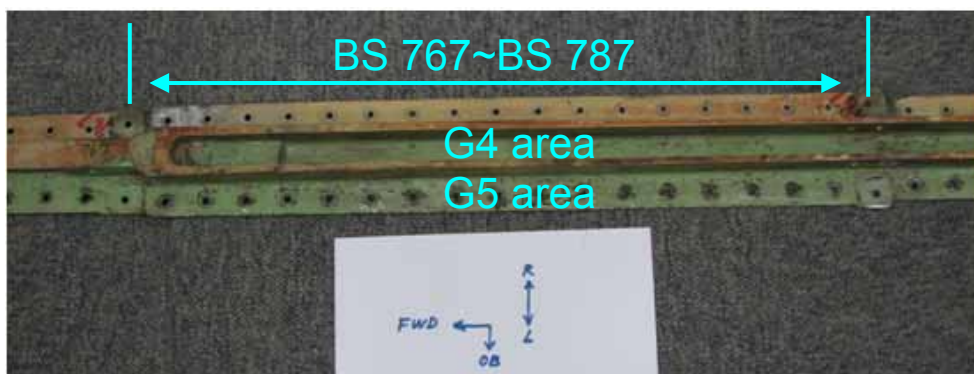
Stringer Corrosion in G4, G5 Area
